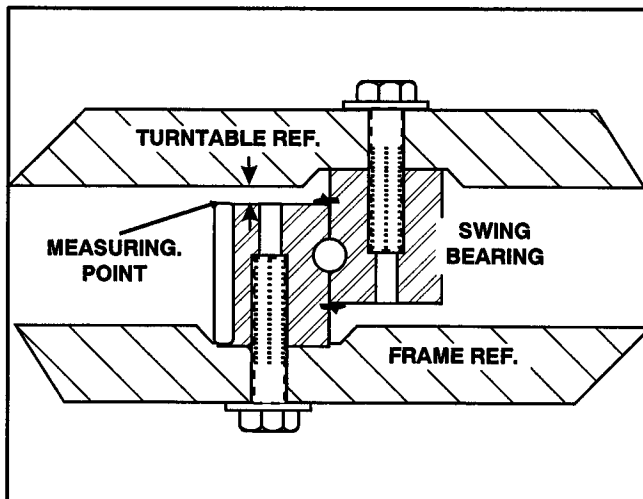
Swing Bearing Tolerance Measuring Point.
